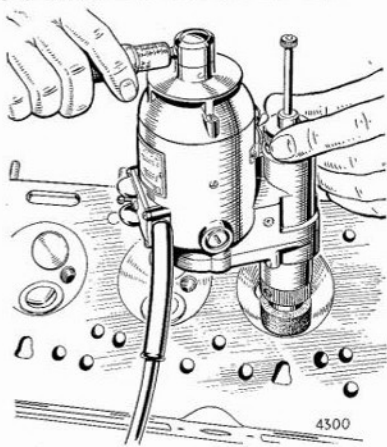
Re-grinding the cylinder head valve seatings, using the Hall Eccentric Valve Seat Grinder
